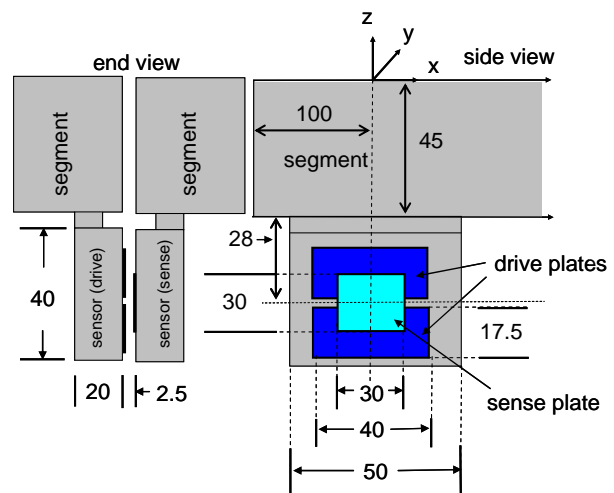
A cross section view of the TMT edge sensor showing critical dimensions in millimeters.
